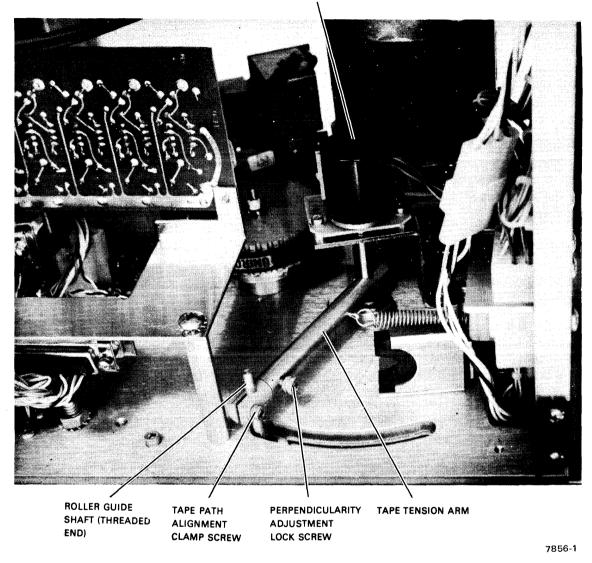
Roller Guide/Tape Tension Arm Connection, Bottom View
